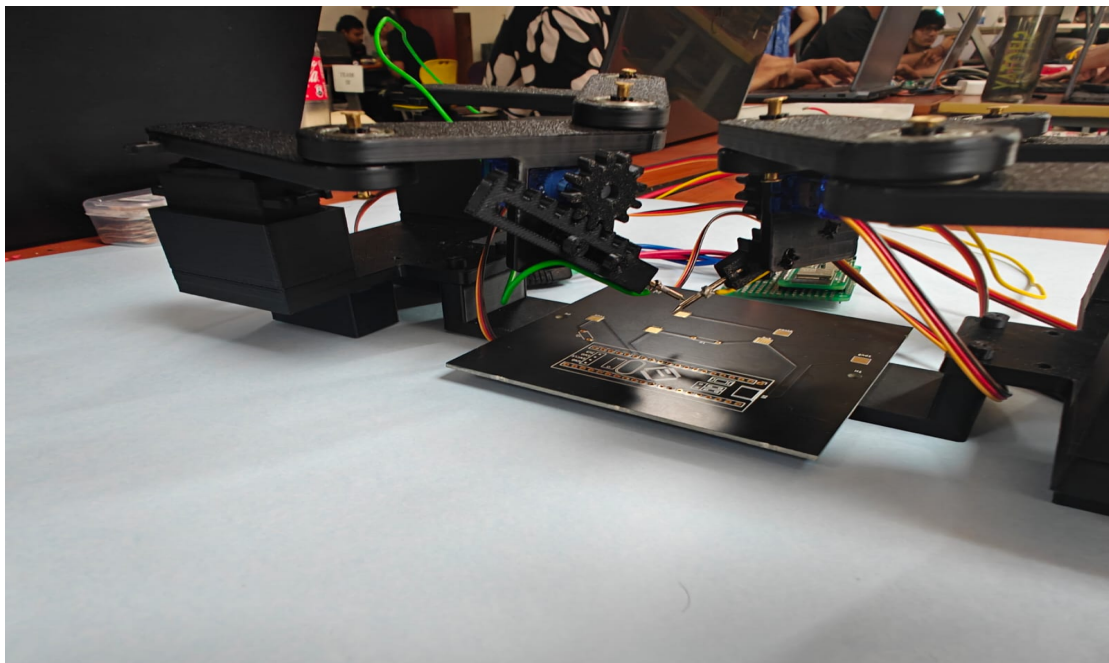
OpenFPT Front View — Dual arms positioned over PCB with probe tips making contact. Visible: MG996R servos at base joints, 3D-printed linkage arms with brass inserts and ball bearings, probe actuation mechanism with rack-and-pinion, and custom test PCB with gold-plated pads.
